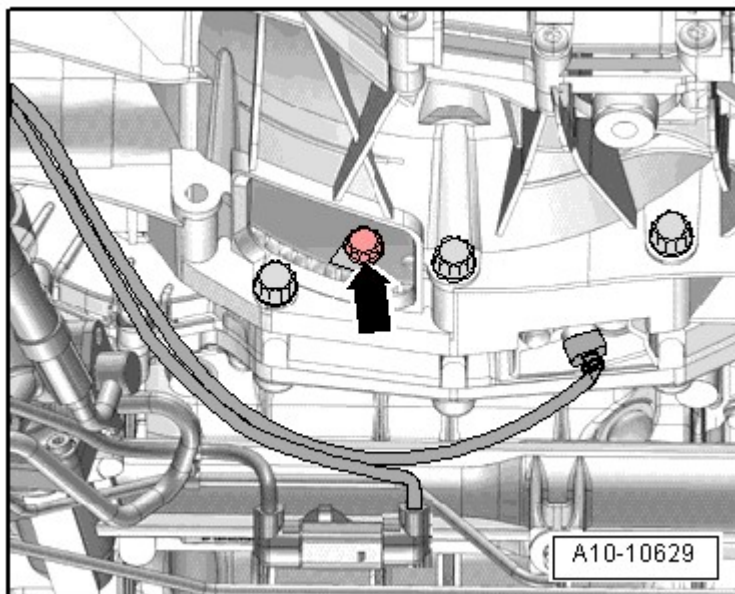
Identifying Clutch Module First Bolt Installation Location
